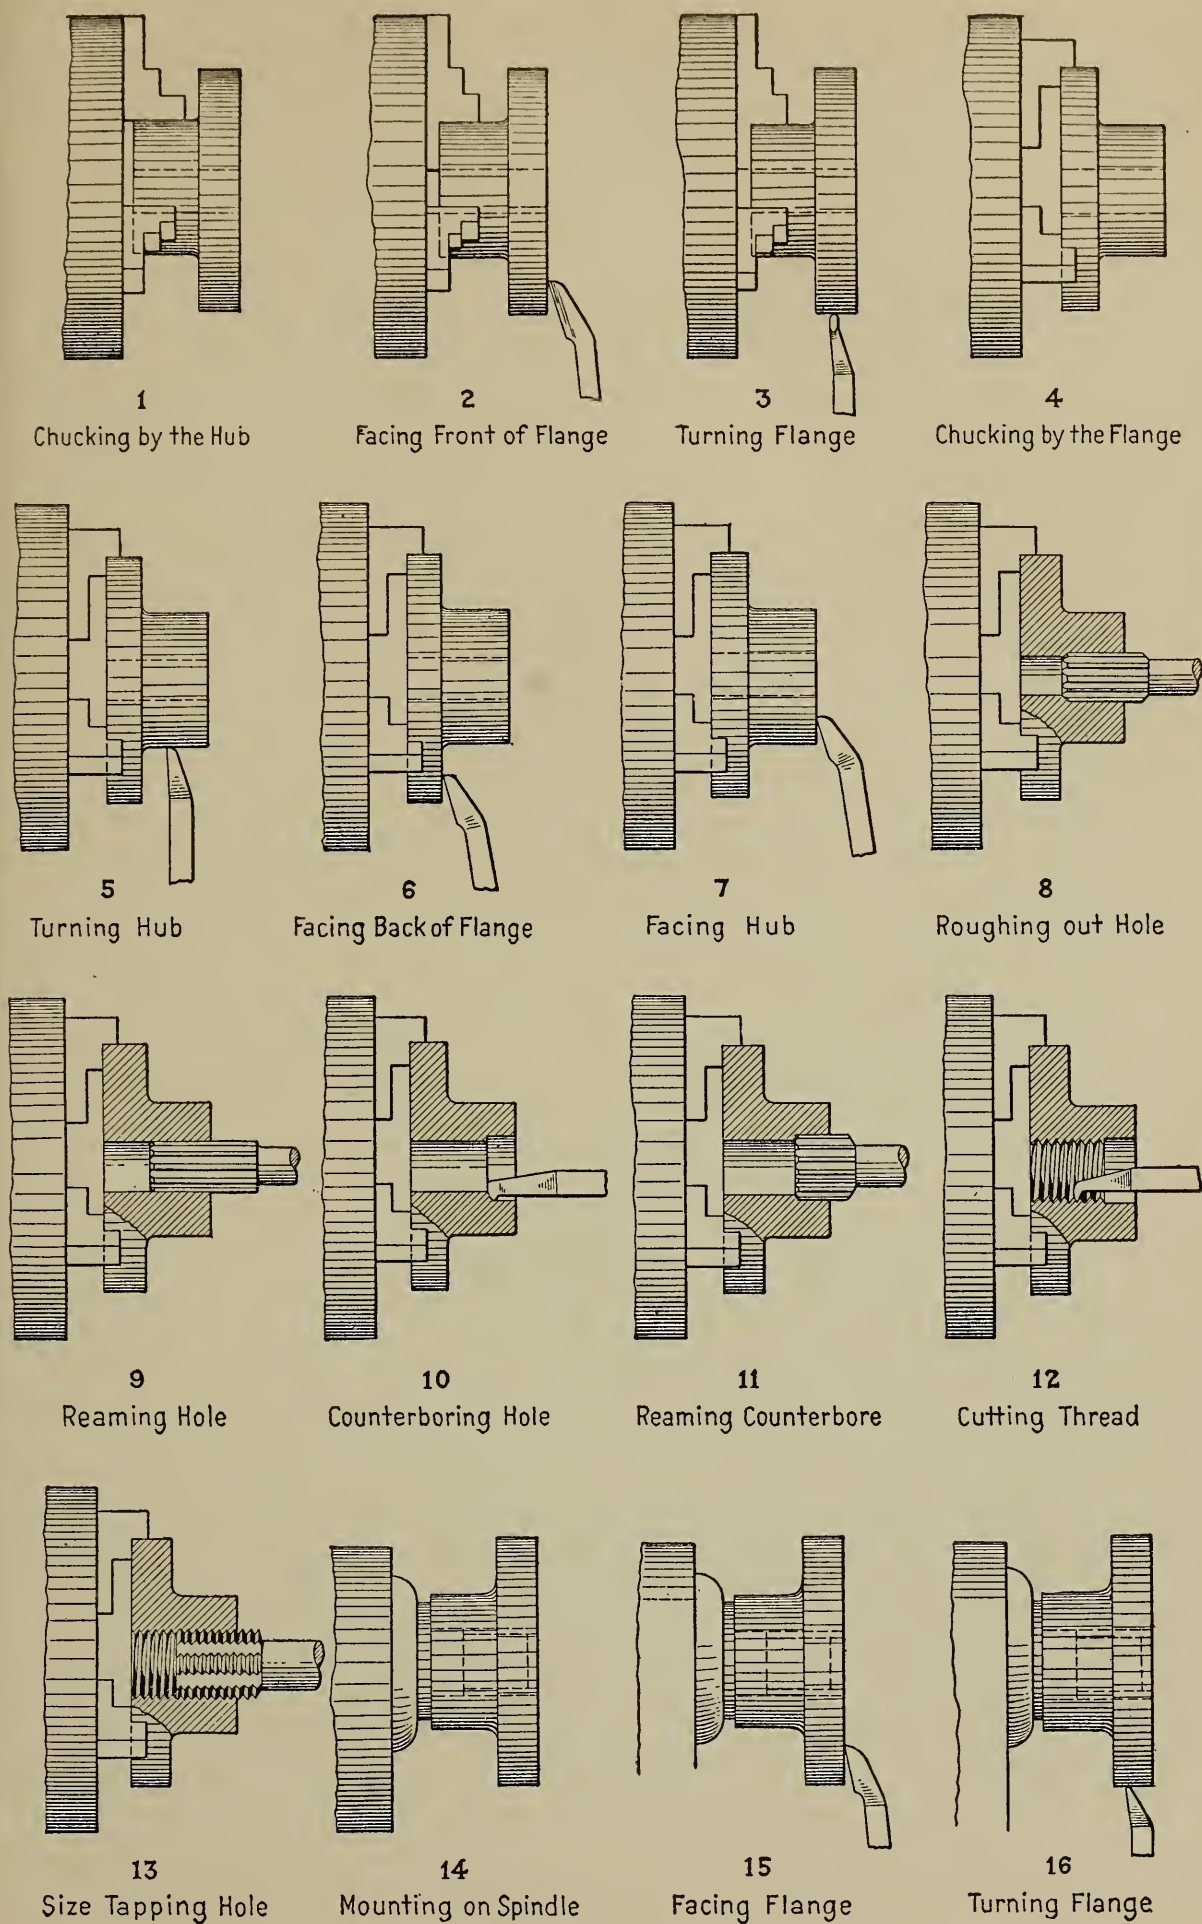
Consecutive Operations in Machining a Chuck Plate.
